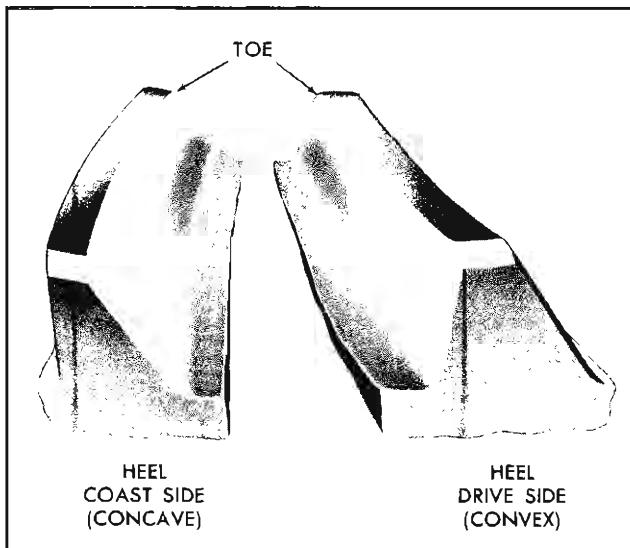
Tooth Pattern—Insufficient Backlash
